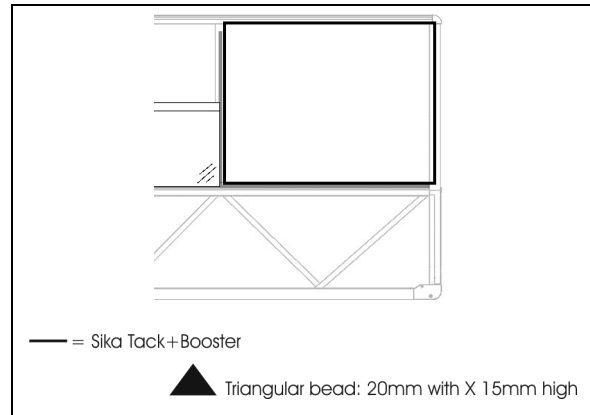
SIDE FIXED WINDOW – 1/4 X 1/2 DOUBLE FACE ADHESIVE TAPE INSTALLATION
